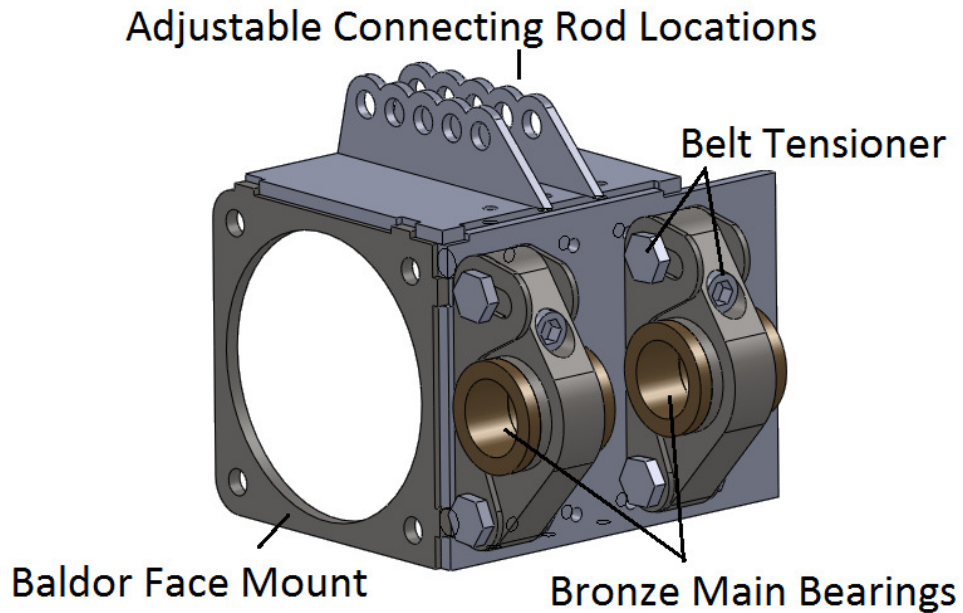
M1 motor mount with tensioning mechanism and main pivot bearings
